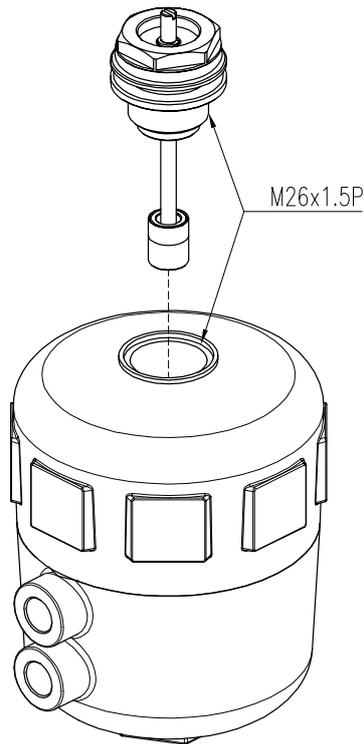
TMP-3000 Feedback Shaft Assembly
